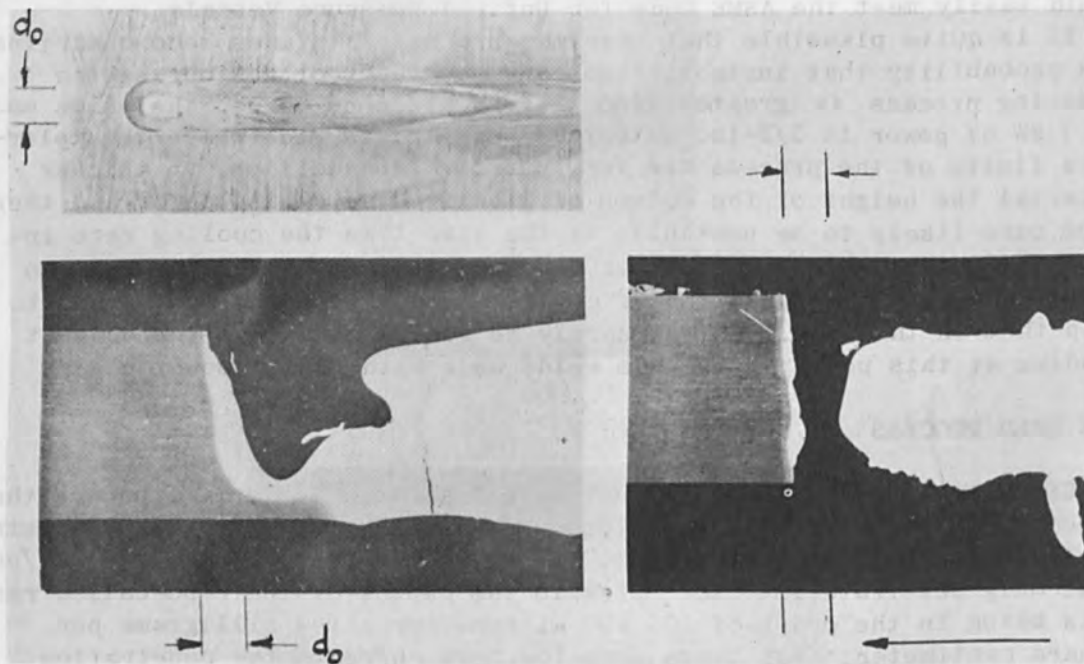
Upper left: weld termination (beam turned off) from the top; beam moves from right to left; inclined melt front on the left. Bottom left: cross section through similar weld termination in 1/4-in. plate; since beam diameter  $b_0$  is only 0.06 in., it is evident that without scattering all of the beam impinges on slanted front face; scattering in the gas may broaden impingement area somewhat, but not much, as calculations show; scattering from solid or liquid impingement area may amount to 10-30 per cent in all directions. Bottom right: cross section through termination of gouge weld; inclined melt front is too steep to intersect all of the beam (feed rate of cold metal not high enough), leading to over-melting and burn-through on the bottom; shape of re-solidification front is essentially determined by surface tension forces.
